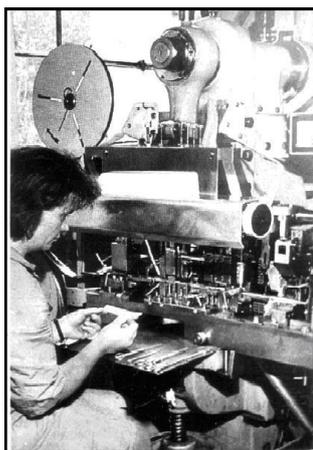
Vertical presser equipped with devices to manufacture inflammatory with polypropylene insulating mass.
